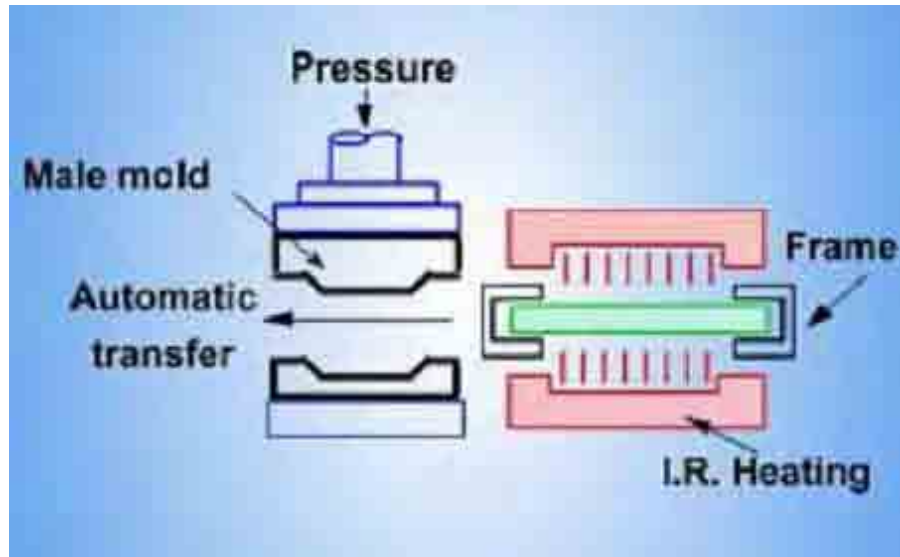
Schematic of the tooling arrangement used for the processing of the ADCOMP demonstrator component.
